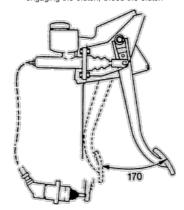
Bleeding the clutch using tool 998 5876 or equivalent
